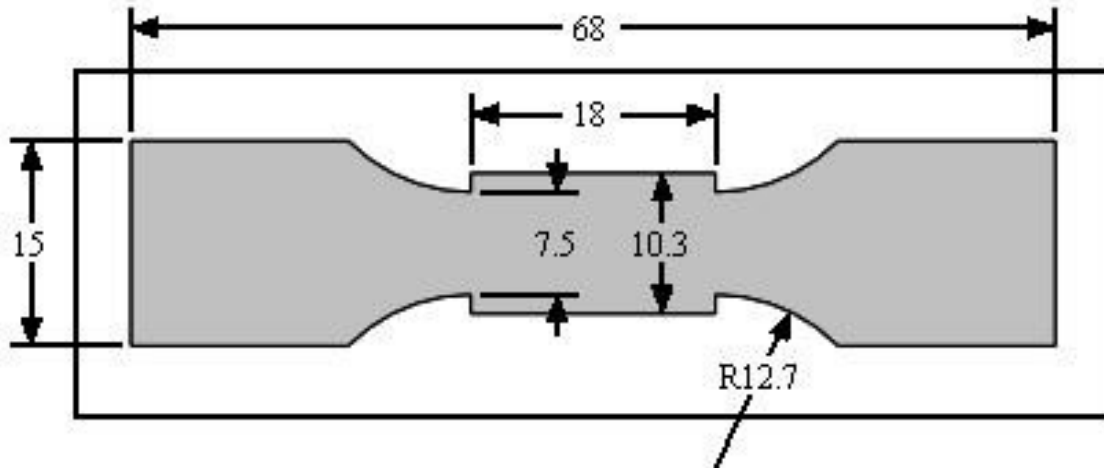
Top view of the reservoir with dimensions in millimeter
